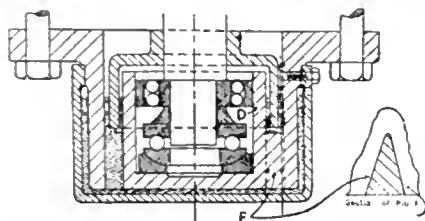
FOOTSTEP BEARING FOR MORTAR MILL.
